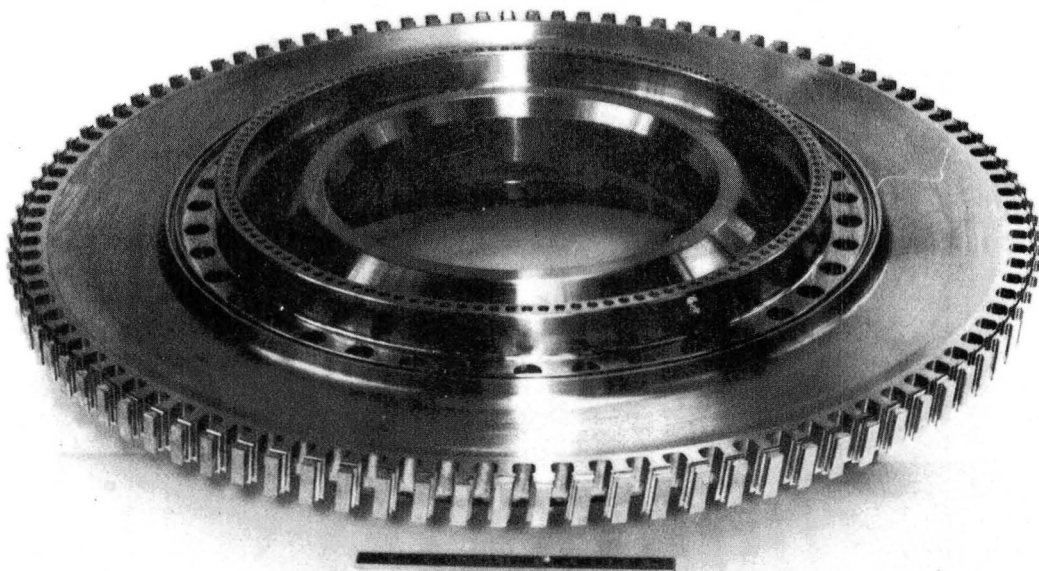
Front View of Finish Machined MERL 76 JT9D-70 First Stage Turbine Disk
